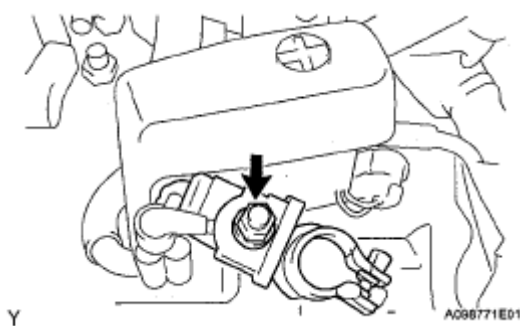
Identifying Engine Wire To Battery Positive Terminal With Nut
